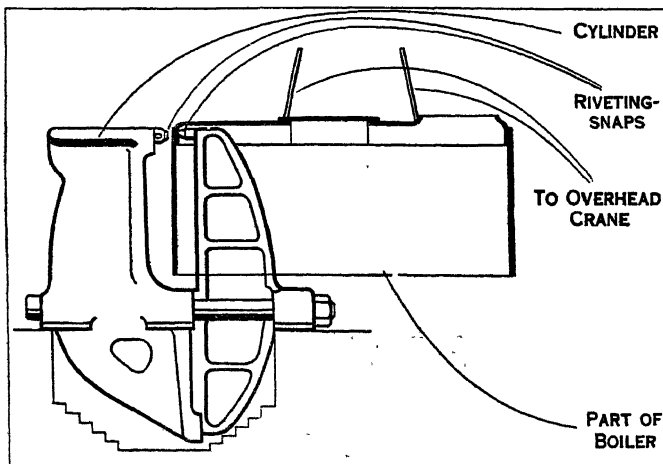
150-TON HYDRAULIC RIVETER RIVETING A MARINE BOILER
